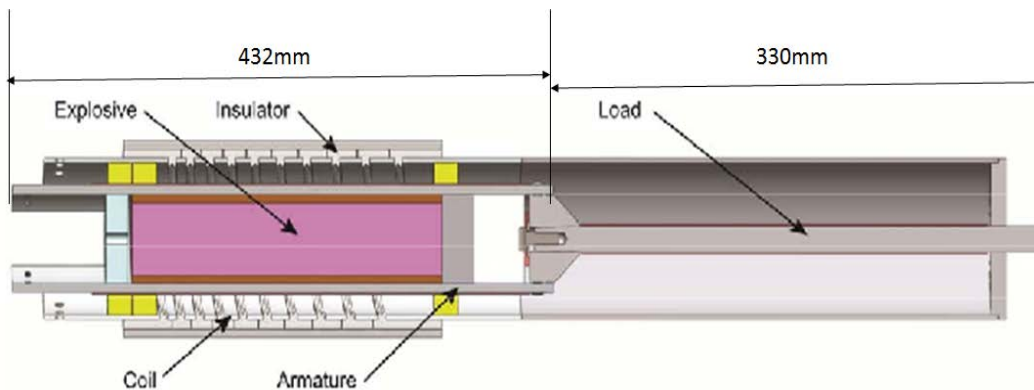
A cross-sectional view of MFC showing the generator and the load²
